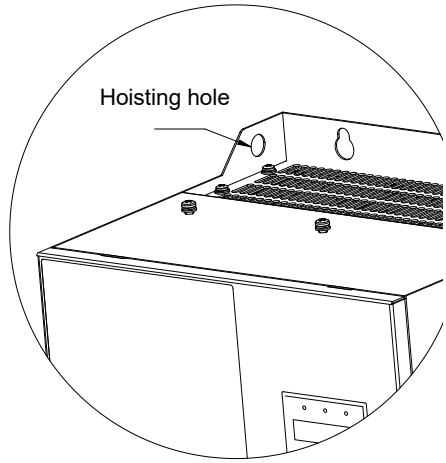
Hoisting Diagram of Sheet Metal Structure
